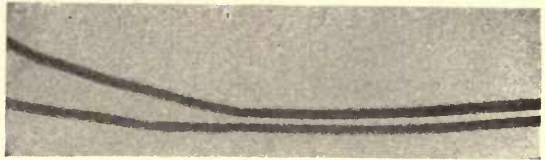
Cabled Copper Wire. Radiograph taken through the insulation. Tube 280
